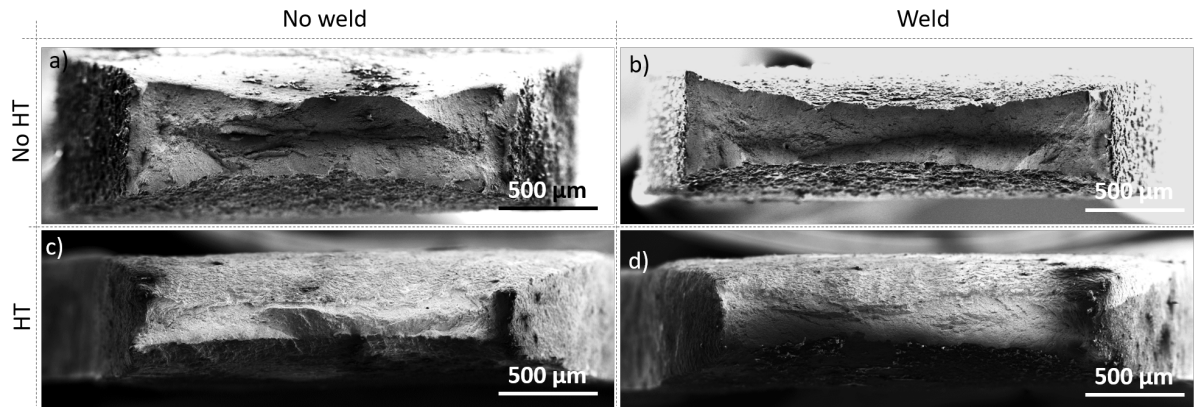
Secondary electron images showing the tensile fracture surfaces after failure for specimens with and without a weld and with and without a heat treatment (HT). The contrast arises from surface topography.
